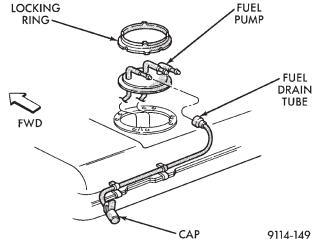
Fuel Drain Tube—Front Wheel Drive
